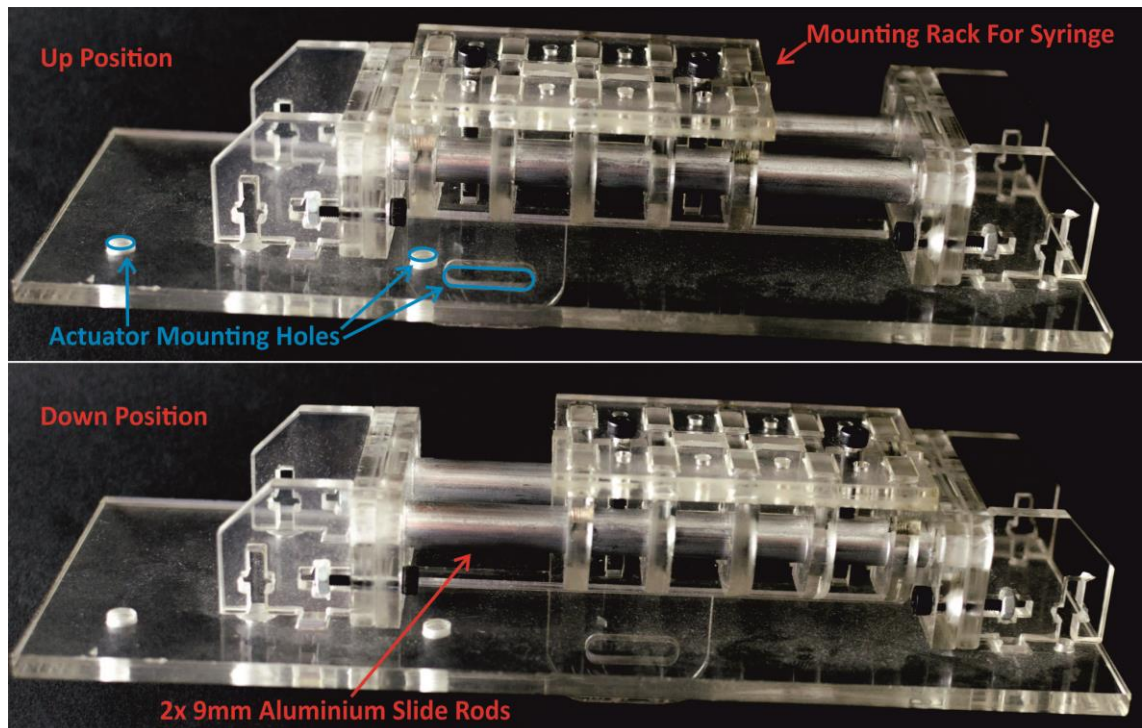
, Prototype syringe sled for deposition head v2, central locking actuator not in picture. figure by author
